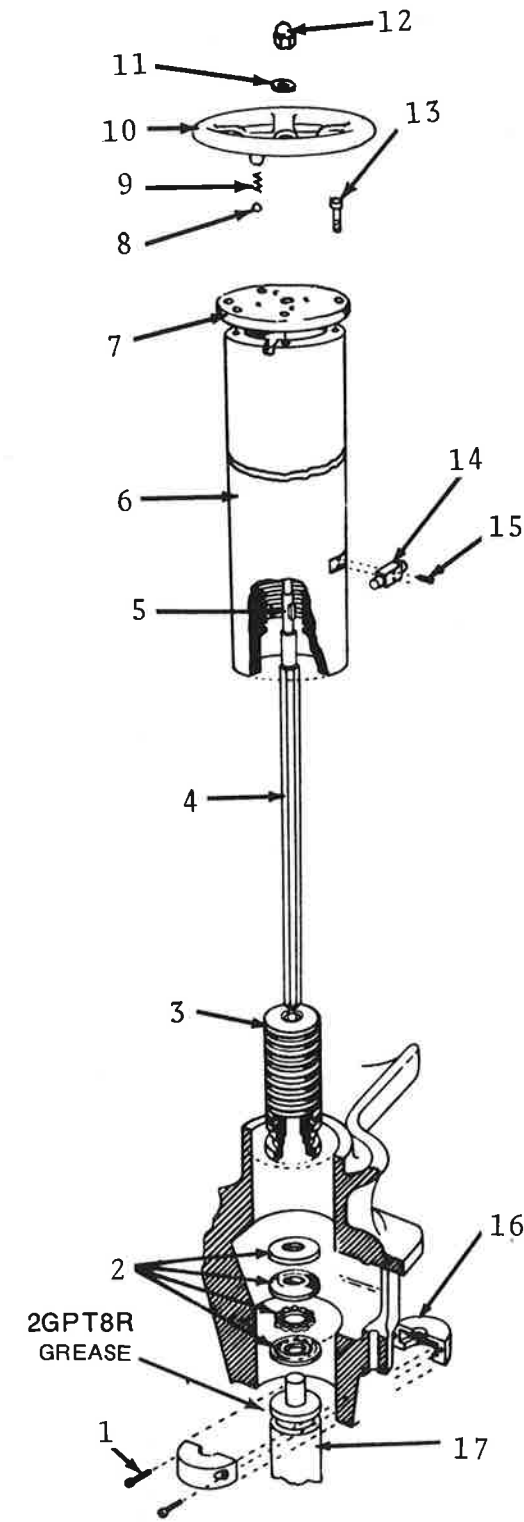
HCM-B2 - Beam Spindle and Connecting Parts - Exploded View
